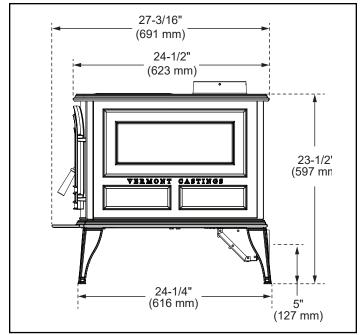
Side View, Outside Air Inlet: 3.5" Diameter (Use with 3" Flex Outside Air Pipe)
